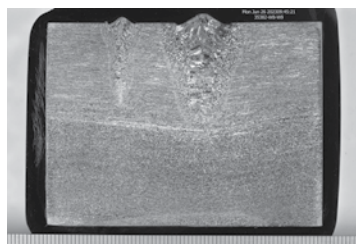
EBOBend welds in thick-section titanium alloy.
